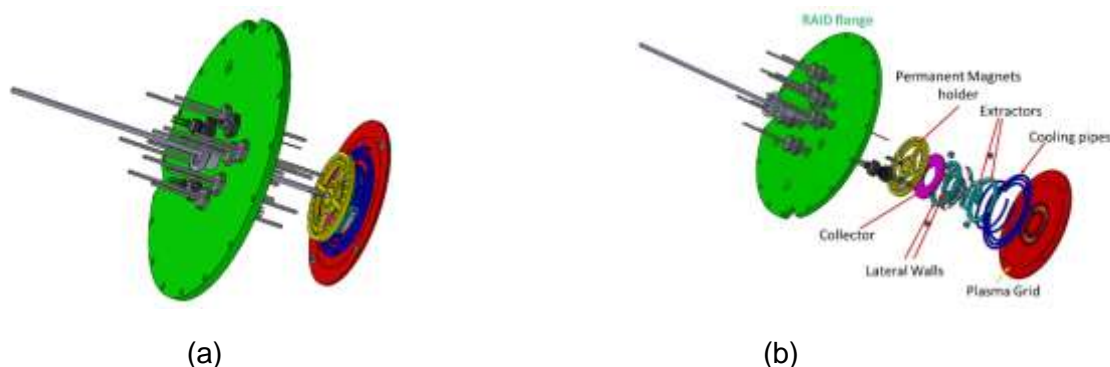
a) SolidWorks 3D CAD of the final prototype. b) Exploded view of the axial extractor.
